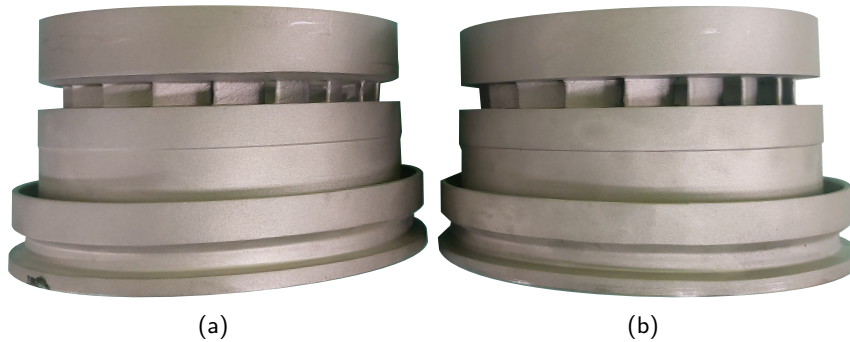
Manufactured nozzle inserts for the: (a) radial fibre rotor (b) non-radial fibre rotor
